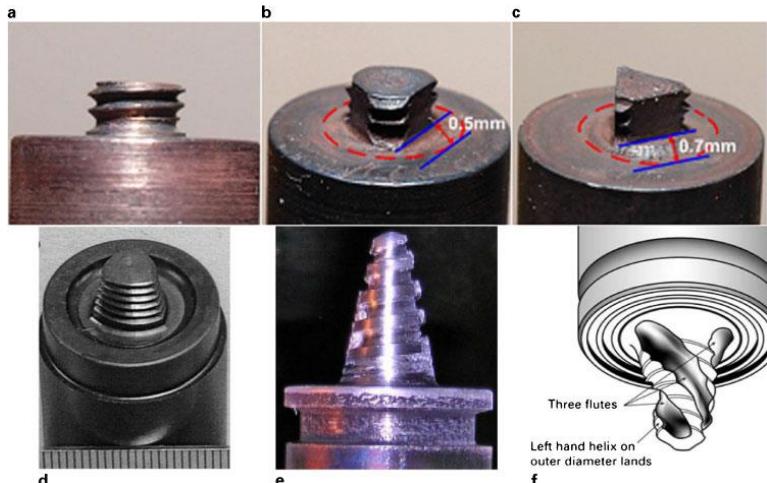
Geometry of welding tool pins: a. cylindrical threaded; b. three flat threaded; c. triangular; d. Trivex; e. threaded conical; f. schematic of a triflute [10-2]
